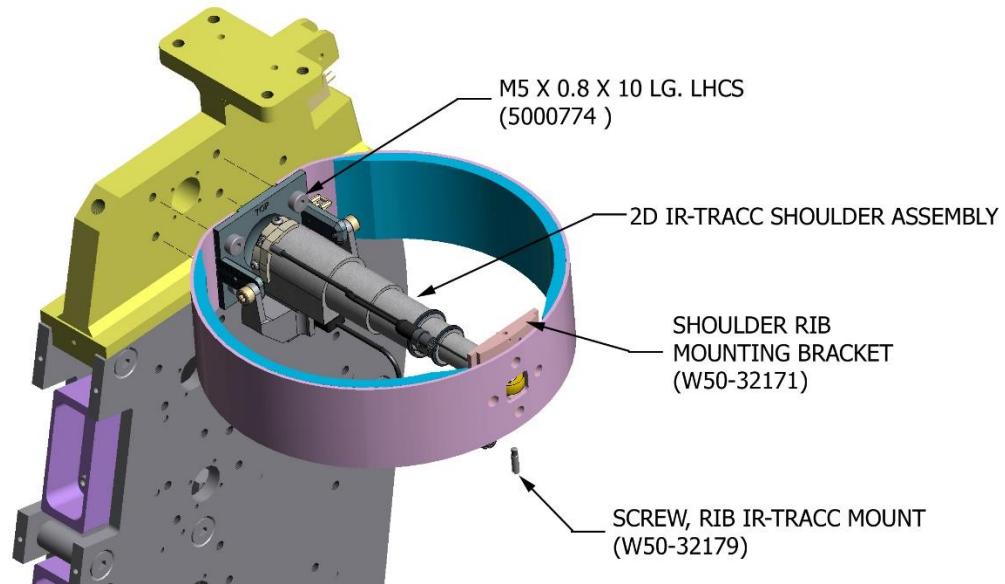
Assembling the inner band with 2D IR-TRACC.
